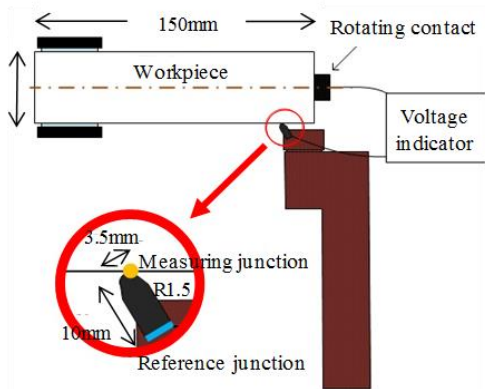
Schematic of tool-workpiece thermocouple method for burnishing
